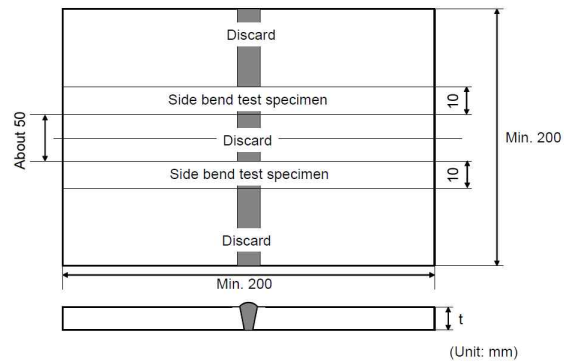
Dimensions and types of test assembly for butt welds (T ≥ 12mm)
